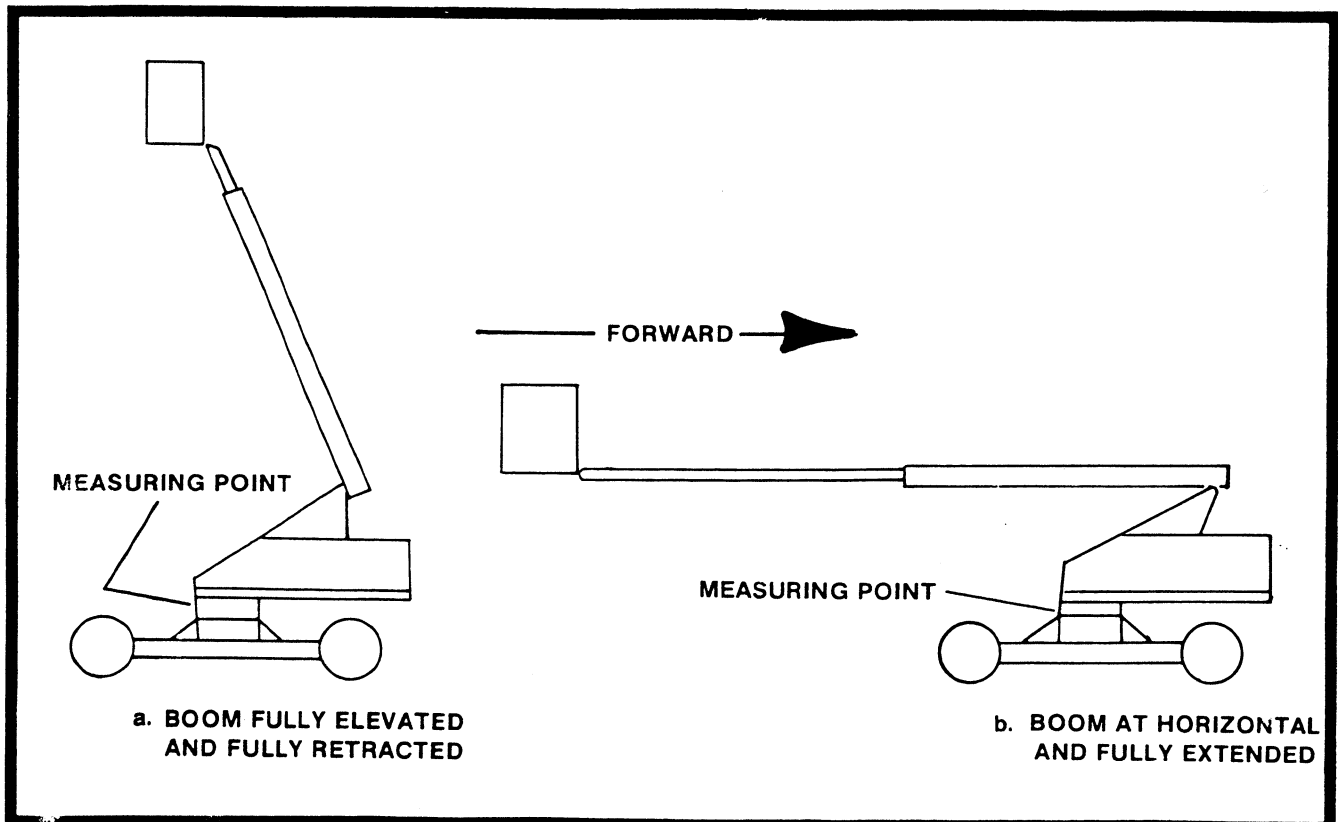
Swing Bearing Tolerance Boom Placement.
